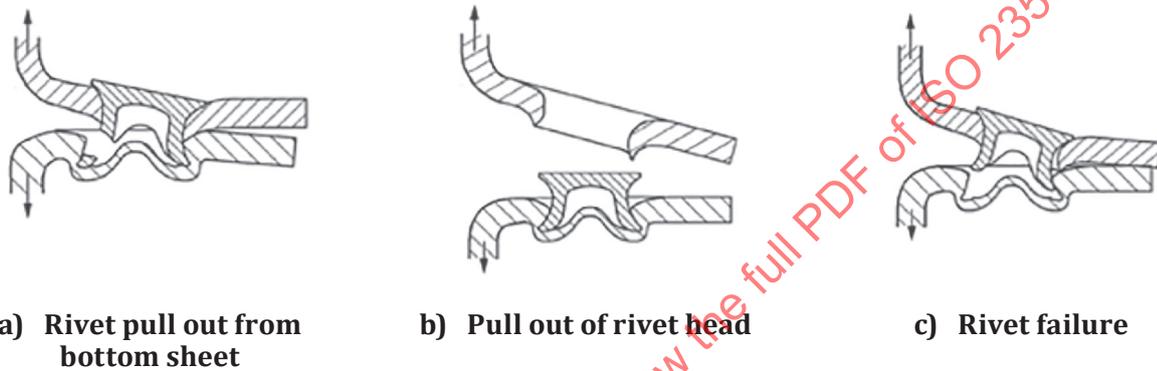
Typical failure modes of semi-tubular self-piecing rivet joints
